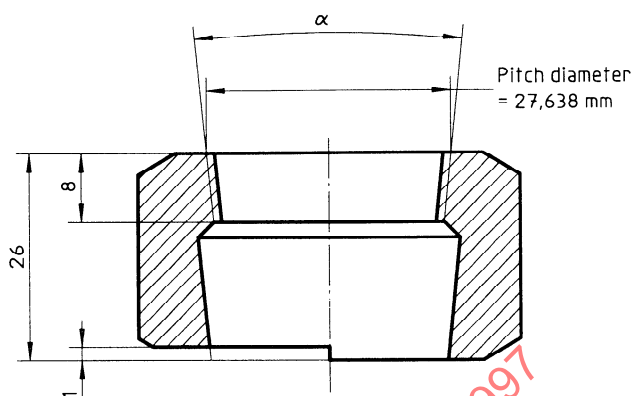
Threaded ring gauge for pitch diameters "I-12"
